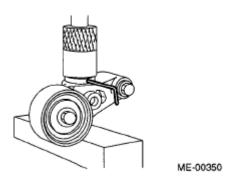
Attaching Automatic Belt Tension Adjuster Assembly To Vertical Pressing Tool Courtesy of SUBARU OF AMERICA, INC.
